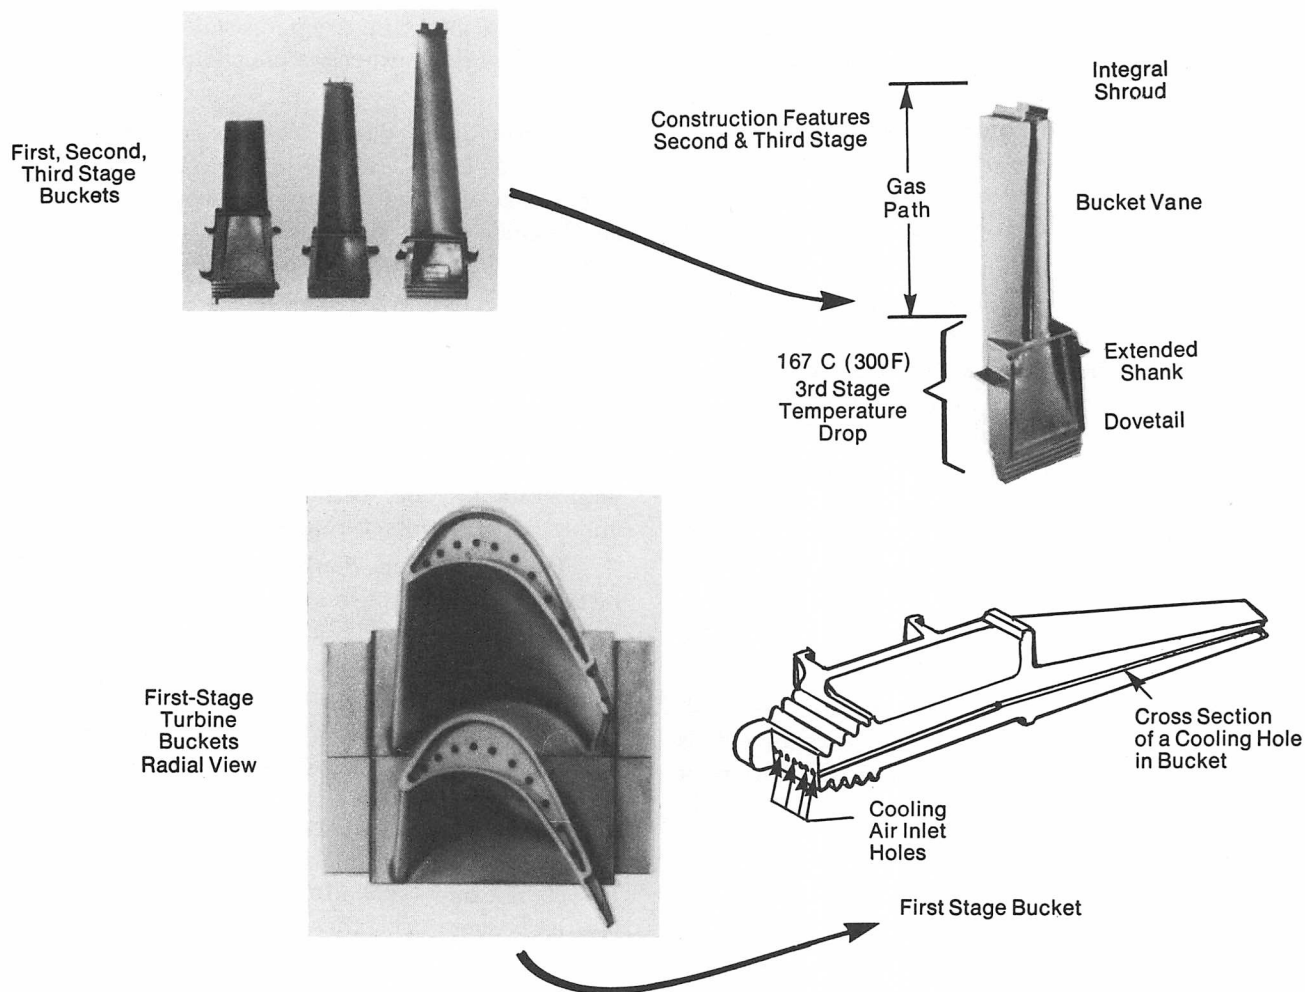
Bucket features for 75 MW single-shaft gas turbine.
